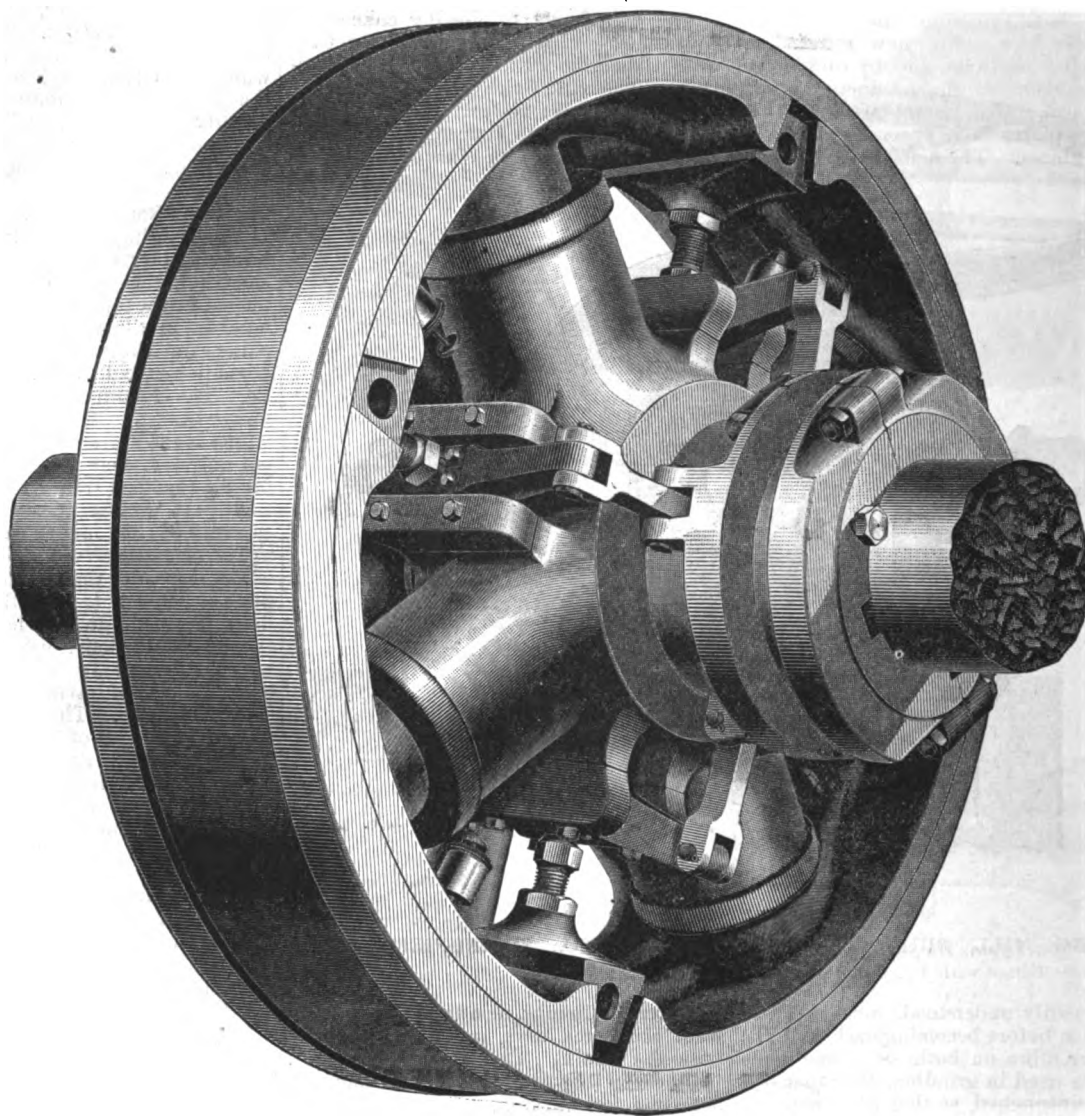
500 H.-P. Friction Clutch Coupling.
